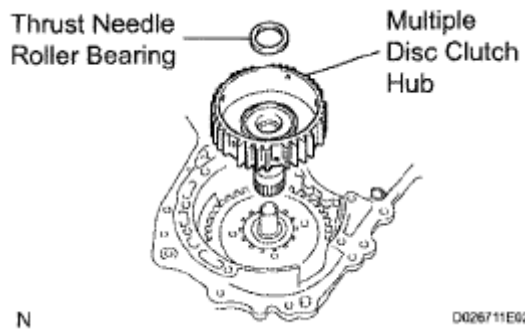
Identifying Thrust Needle Roller Bearing And Multiple Disc Clutch Hub
